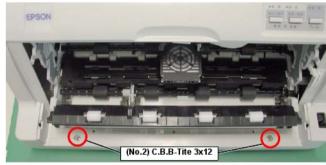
2 Screws Securing the HOUSING ASSY, UPPER
